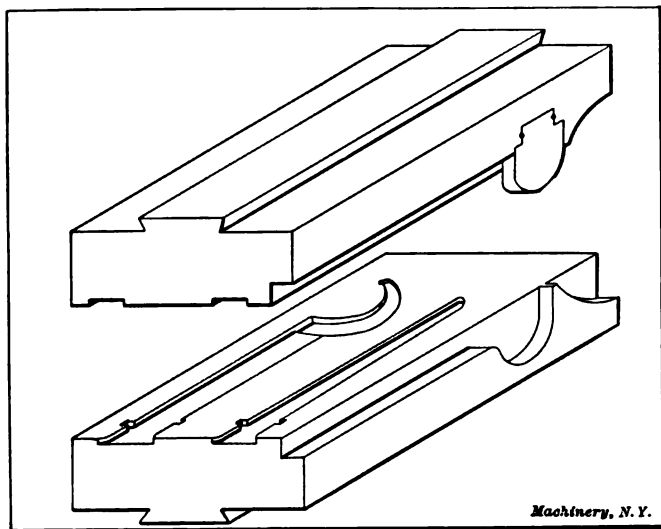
Drop-forging Dies for Making a Long Forging by Halves, to
